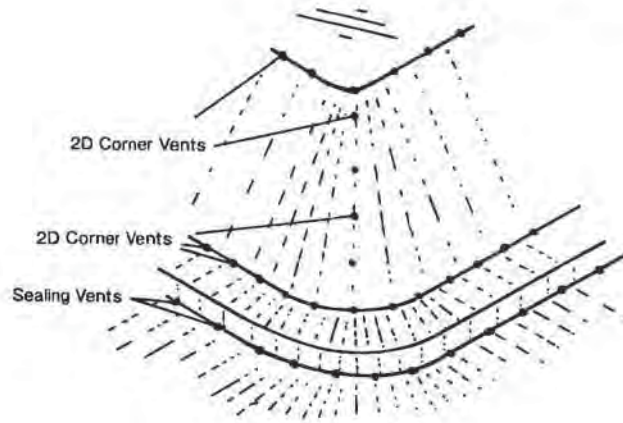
Vent hole locations on two-dimensional vertical and horizontal male mold surfaces and sealing locations
